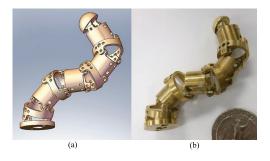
(a) Schematic MINIR and (b) MINIR prototype
